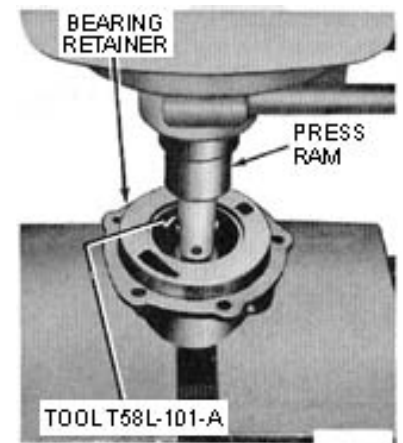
Removing Rear Bearing Retainer Outer Cup, Bearing, and Seal
